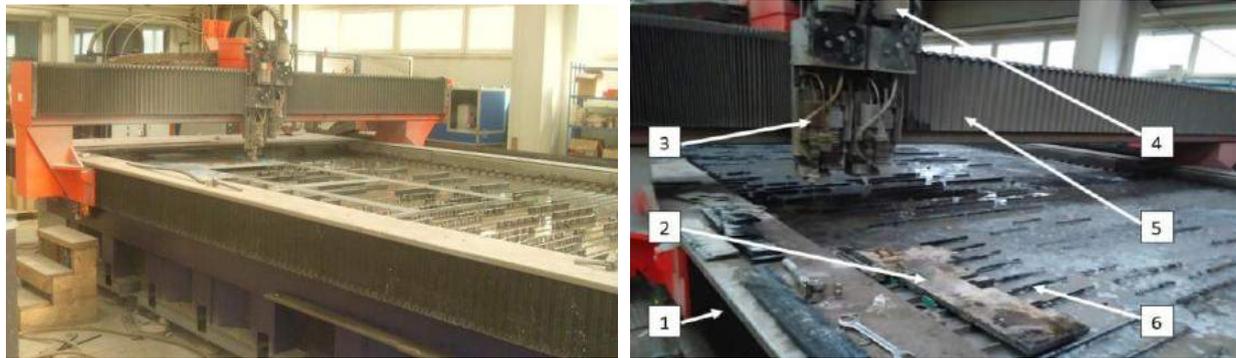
a) The Bystronic ByJet Pro L machine; b) Elements of the considered abrasive water jet machine
